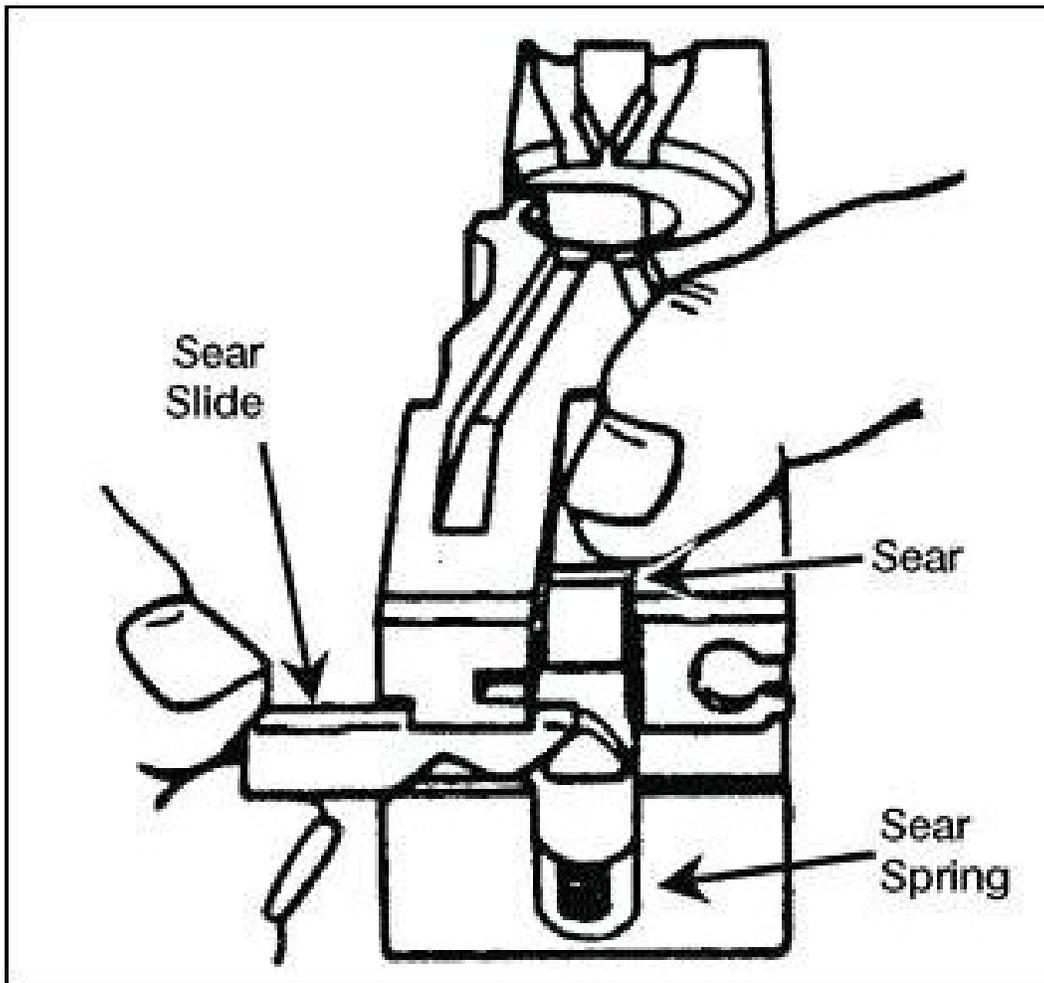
ST-1025_14 (Removal of sear slide, sear, and sear spring)
